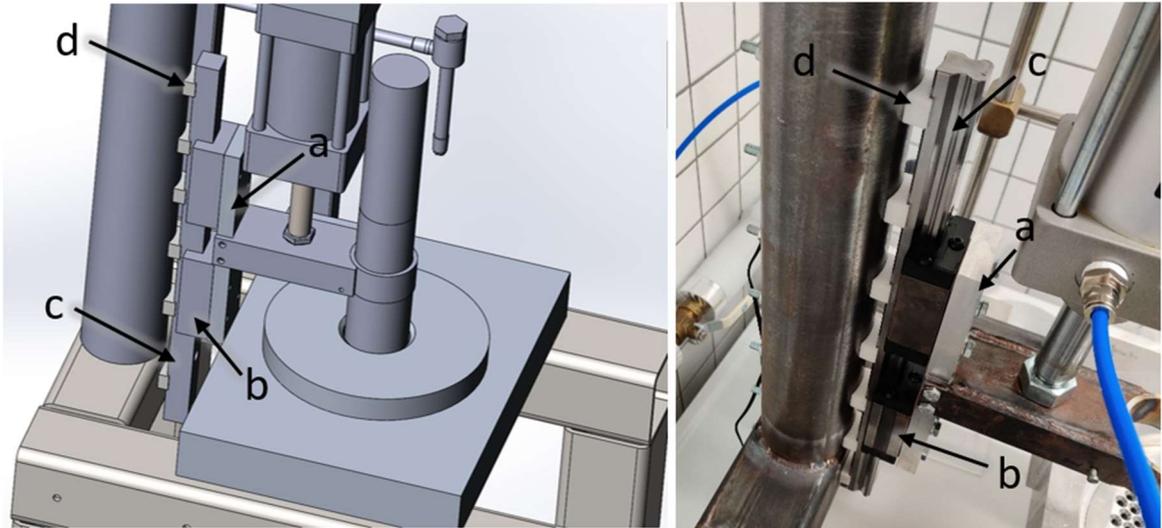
Linear rail guide system - (a) plate for attaching nodal hold and holding two linear rail carriages, (b) rail carriage, (c) linear rail, (d) 3d printed spacers.
